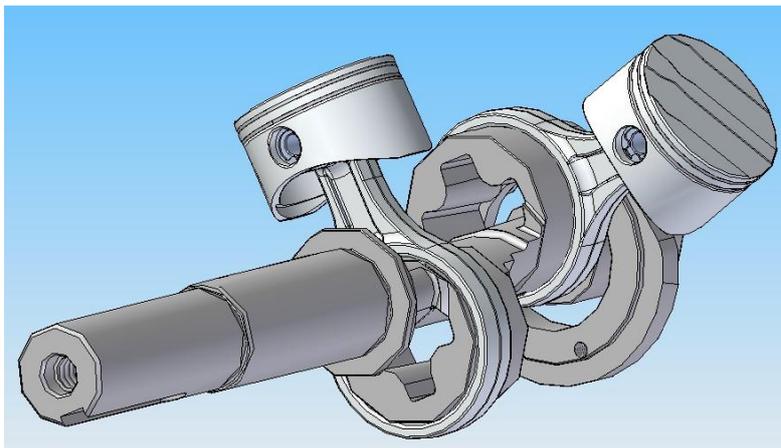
Motor shaft and connecting rod for PP2-L/Hxxxx, PP4-L/Hxxxx, PP4-L/HNxxxx
